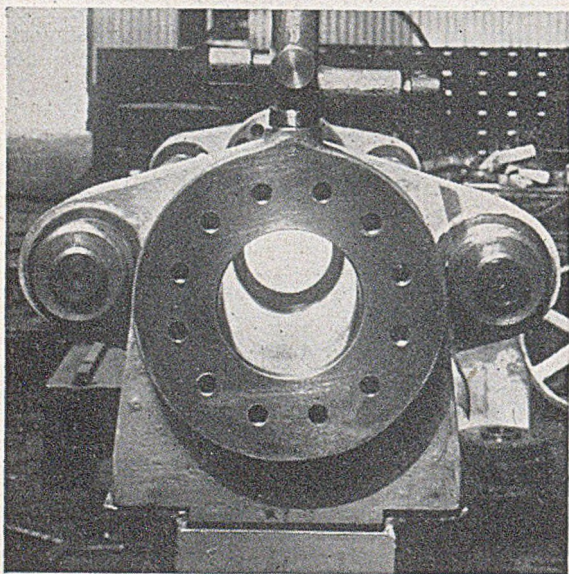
Tube-testing Cylinder Casting (made by Method Four) in Position after machining; the Bore was Perfectly Sound.
